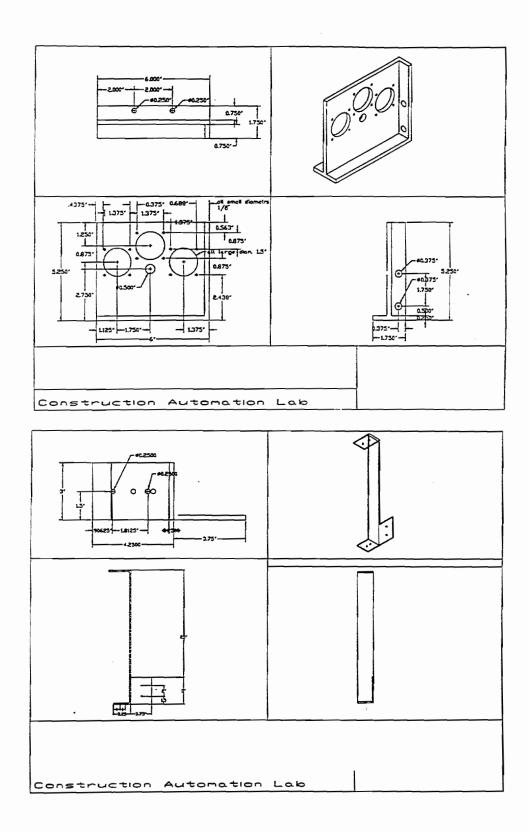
Turret Drawings -Manufactured by the Automated Construction Laboratory
